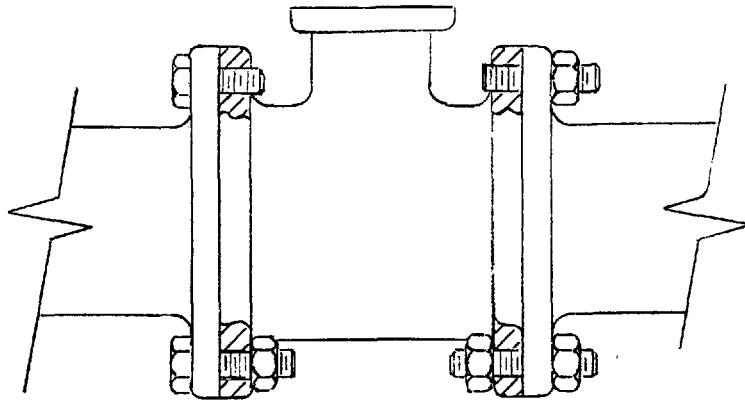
FLANGED ENDS, BOLTING OPTIONS
